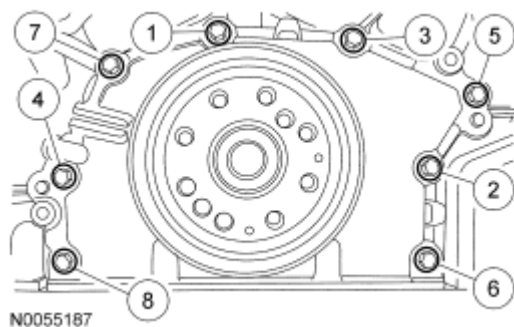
Installing Crankshaft Rear Seal Retainer Bolts In Sequence
